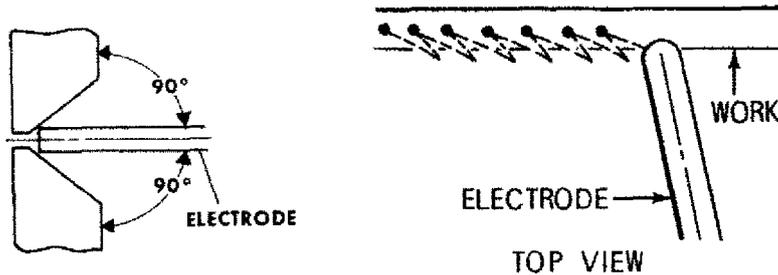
Whipping procedure used to weld the root bead in the horizontal position.
